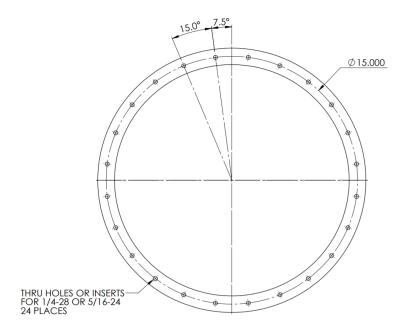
STANDARD 15-INCH RING MOUNTING INTERFACE BOLT PATTERN
